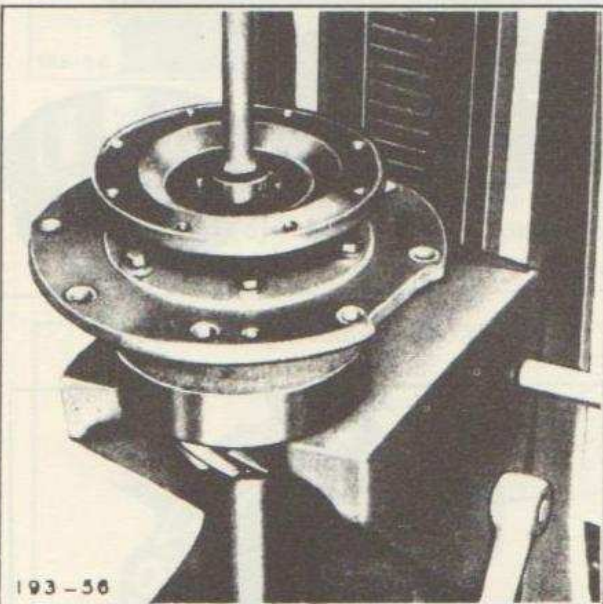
Pressing Thru Shaft out of Forward Drive Flange and Pinion Retainer
